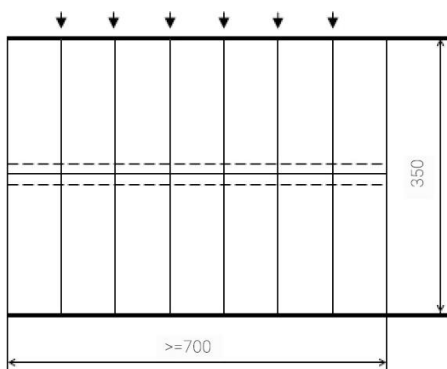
Laboratory sample sewn with a seam and marked cutting lines
